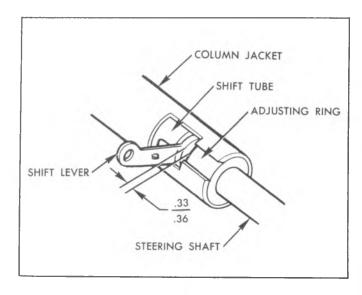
B-34--Shift Tube Adjustment-Automatic Transmission
